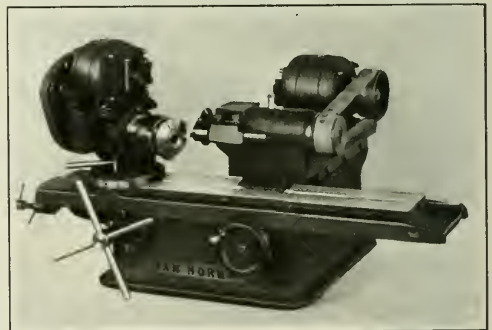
Turning Angular Surfaces on the Van Norman "Relio" Bench Grinder
